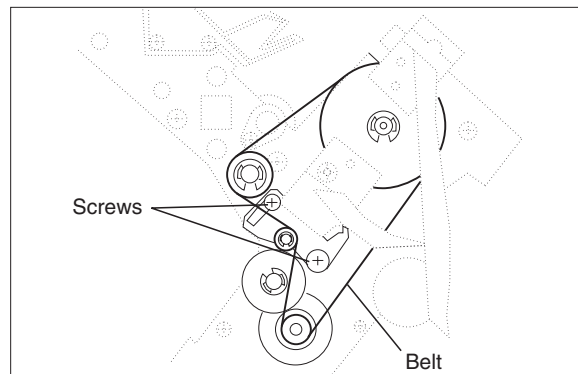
Paper Feed Motor Belt. (Viewed From Right Side)
